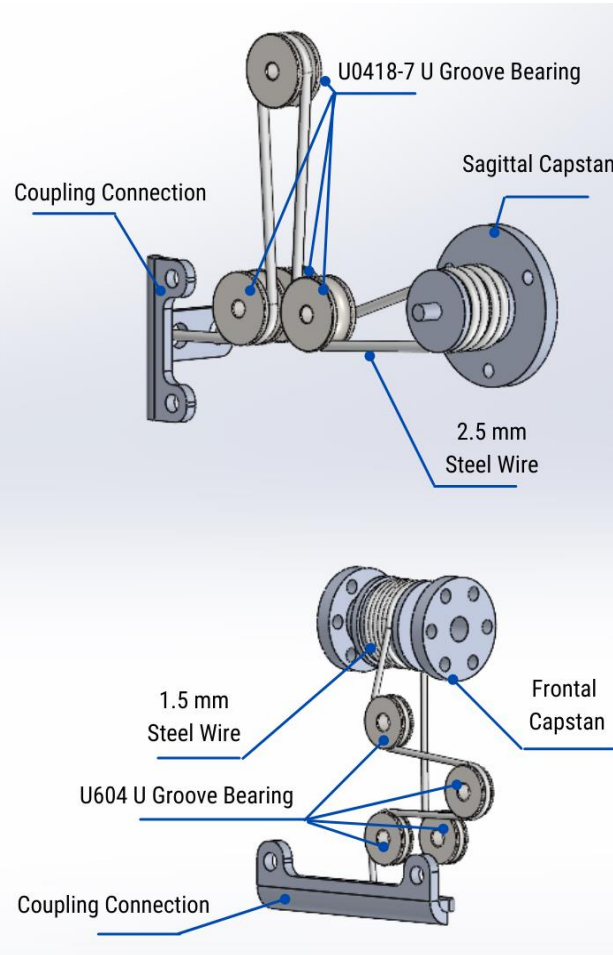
The steel wire winding at backpack mechanism, right leg.
